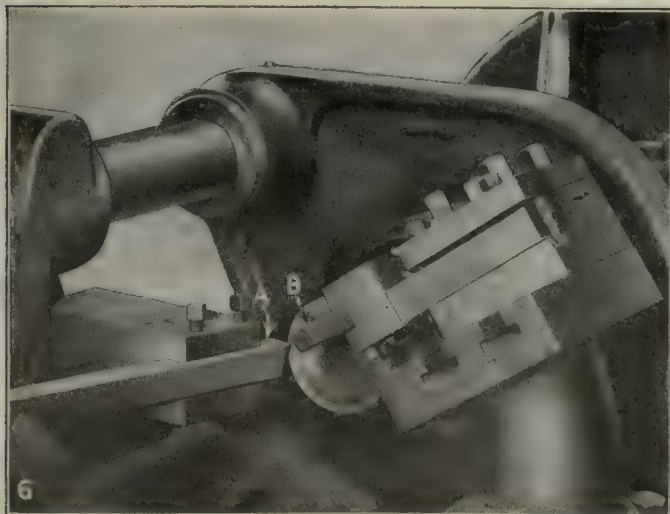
THE TOOLS USED IN TURNING AND FACING
